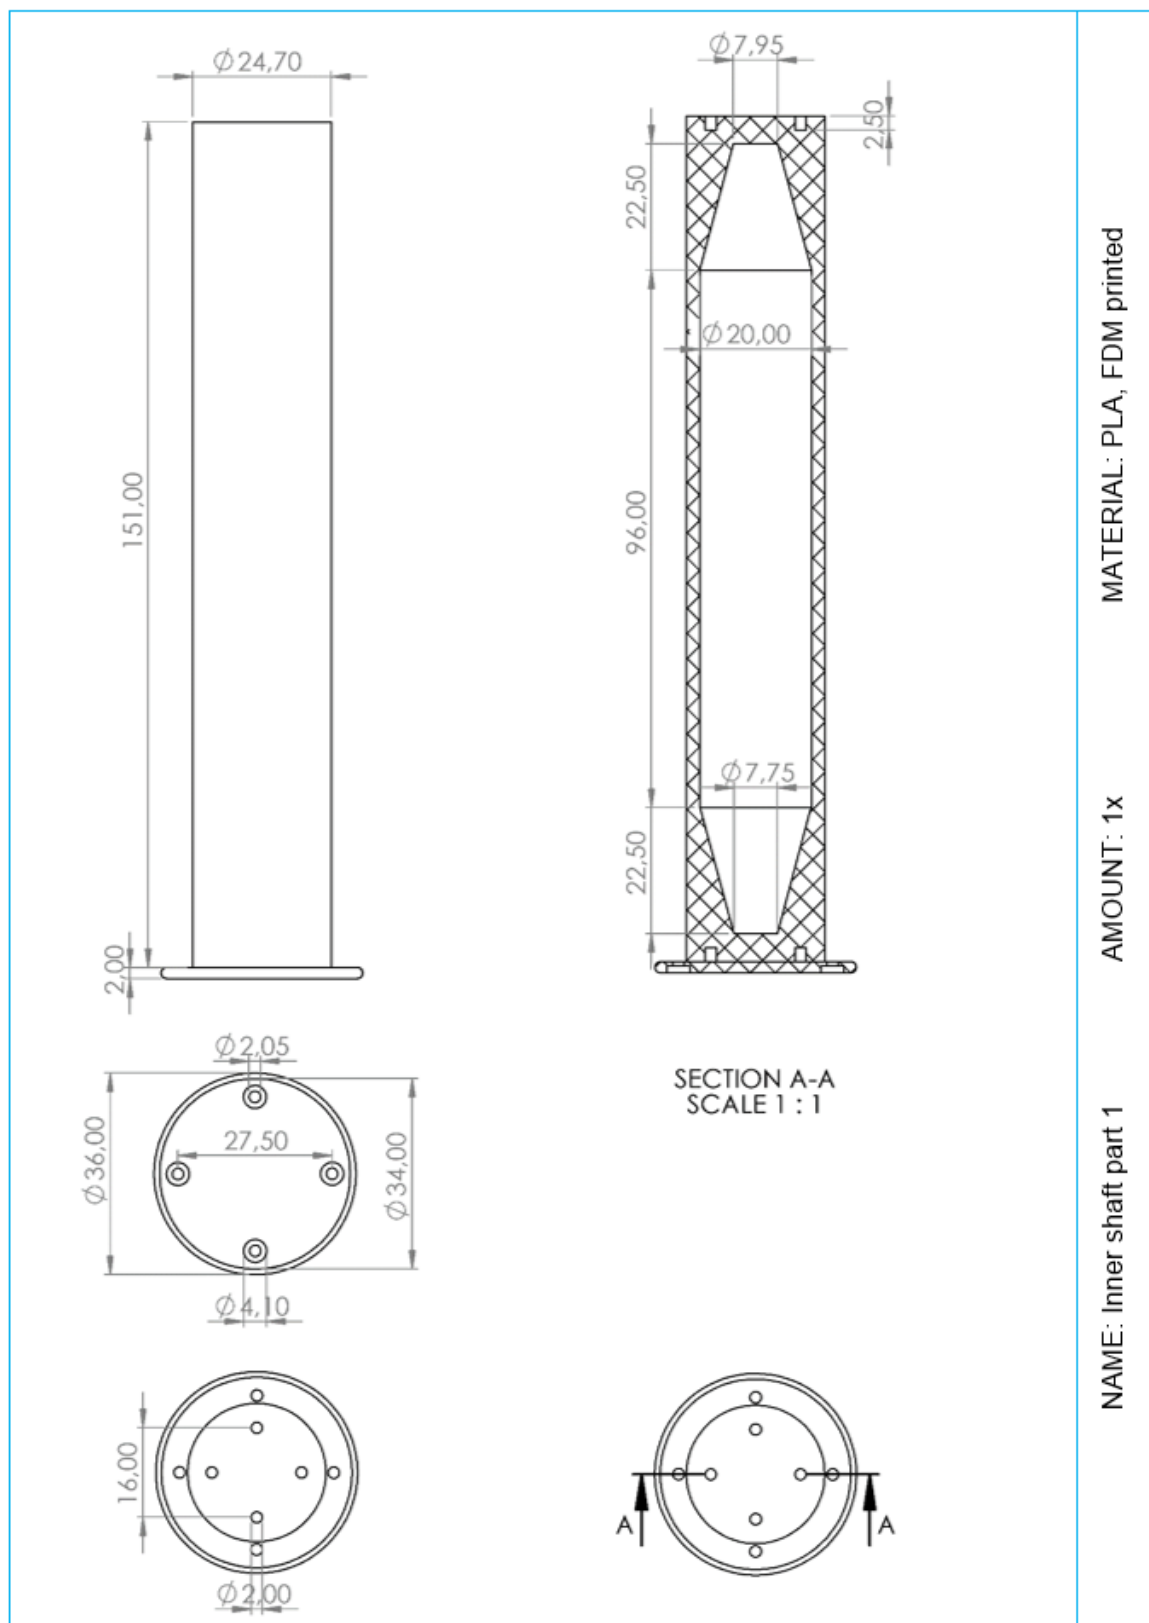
Construction drawings of the inner shaft - 3D Printed prototype
